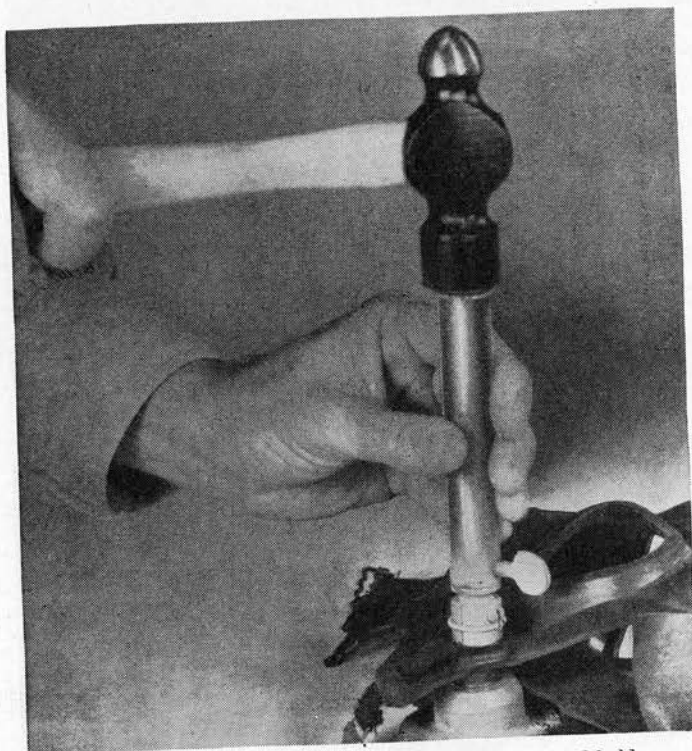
Closing rivet, using eyelet chuck and hand holder.
